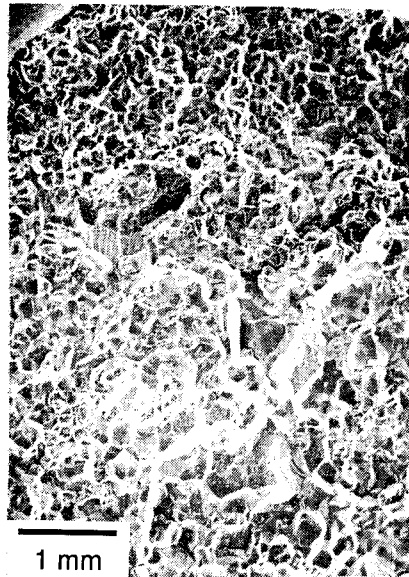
An overall tensile fracture surface of the Al trunnion casting sample indicating brittle fracture with secondary cracks.
